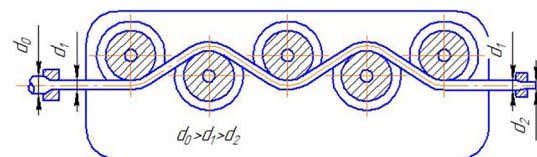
Scheme of wire production by drawing treatment with alternating bending with torsion [31].
